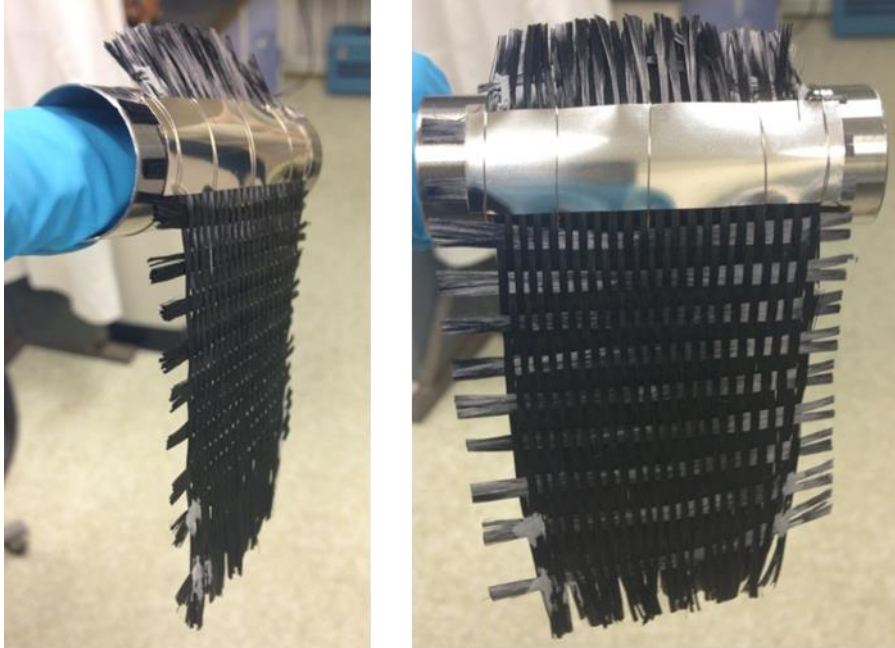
Pre-braze assembly for two articles: carbon fiber weave and Ticusil foil wired to a 3-inch Inconel tube
